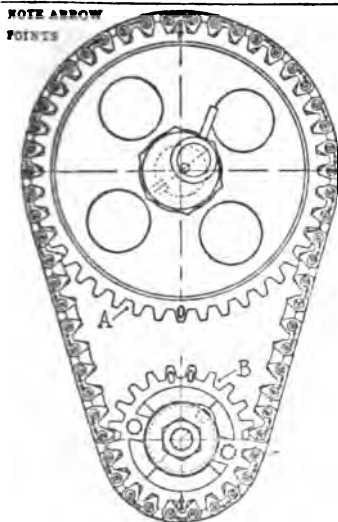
The marks on the camshaft gear (A) should line up with those on the crankshaft gear (B), before the gears are removed, and should be replaced in exactly the same position
